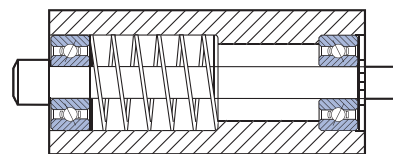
Spindle Assembly using compression coil spring — shaft rotation
